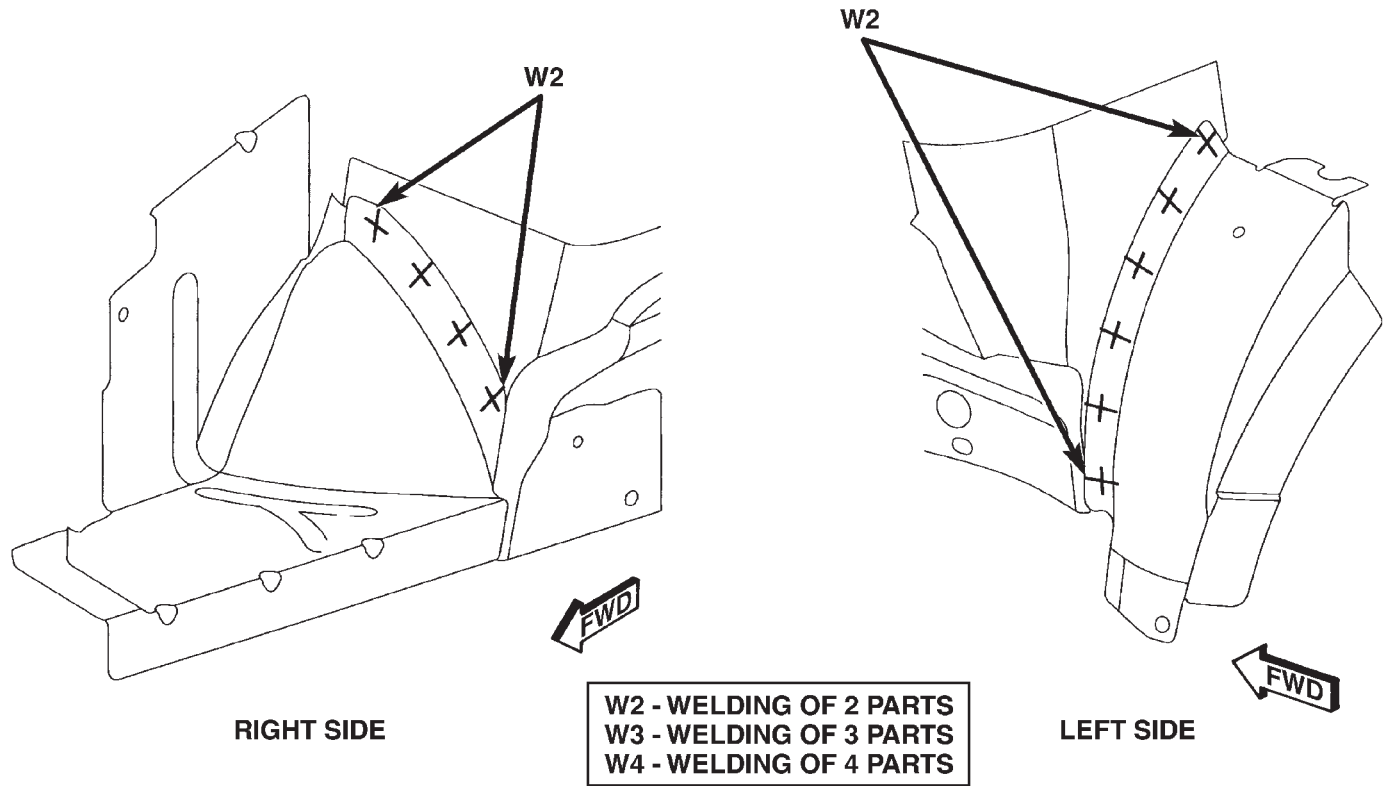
UPPER FRONT SUSPENSION MOUNTING CAP & REINFORCEMENT TO UPPER LOAD BEAM
